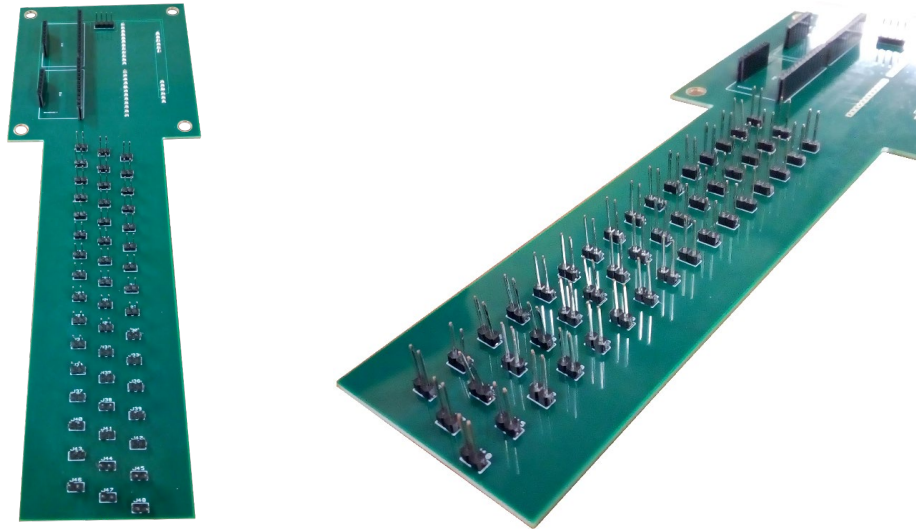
Dimensions of the sensing units – multi-layer sensing unit
